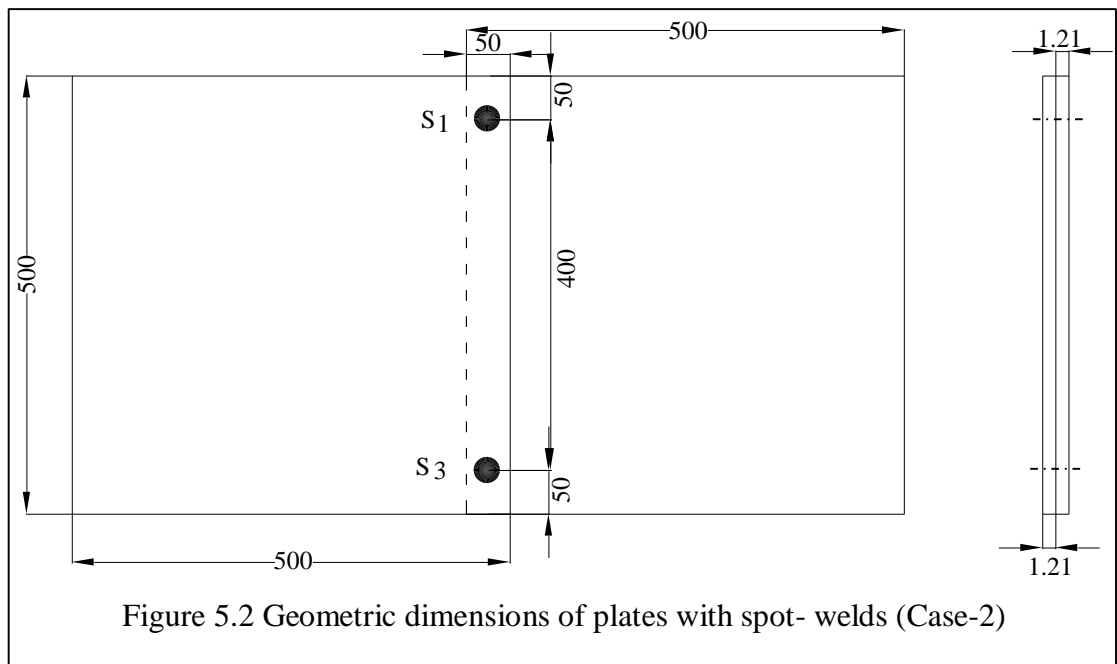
Geometric dimensions of plates with spot- welds (Case-2)
